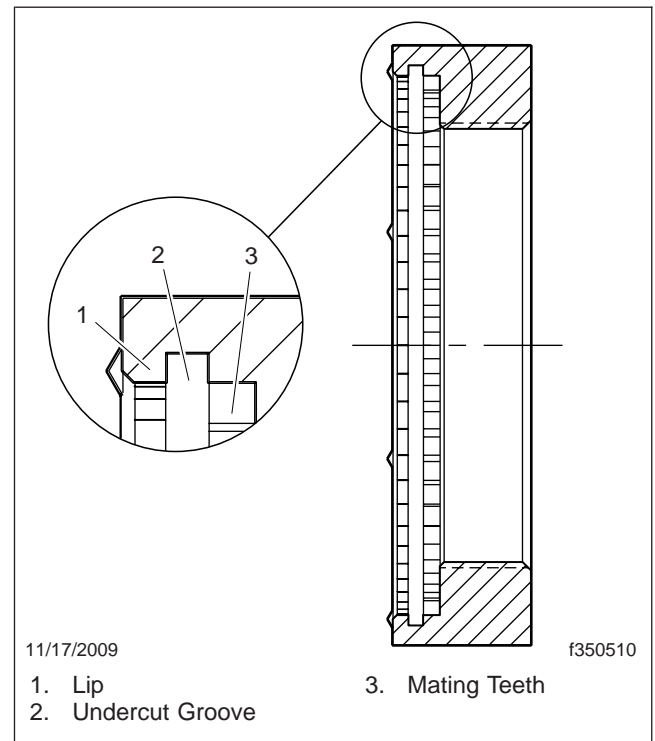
, Pro-Torq Spindle Nut, Cross Section
